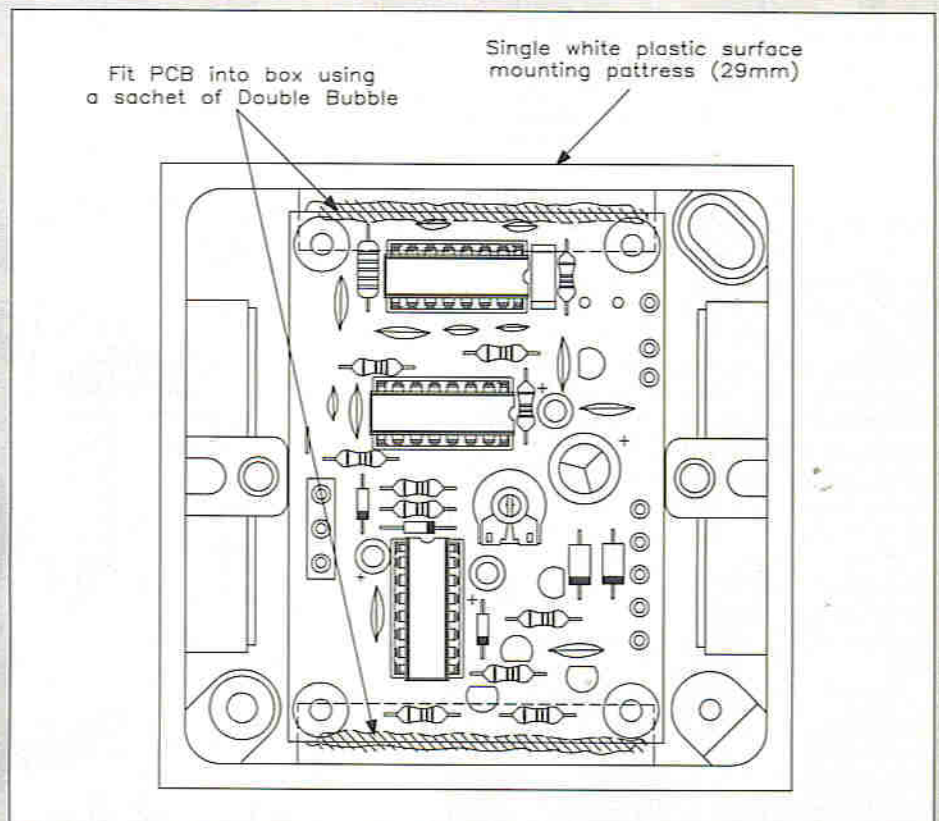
Fitting the receiver PCB to a surface-mounting single pattress.
